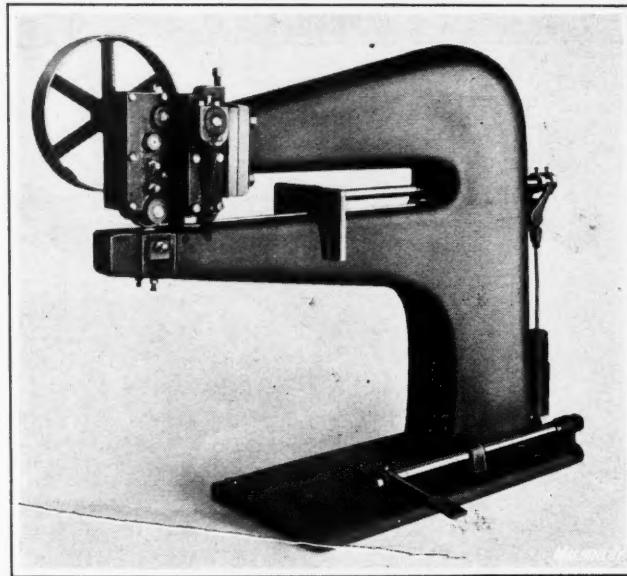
Seam-closing Machine built by Niagara Machine & Tool Works are first formed on the ends of the sheet to be joined, as shown at A and B in Fig. 2, after which the sheet is rolled to a cylindrical shape and placed over the horn of the machine with the offsets lying on the guide piece set into the top of the horn.
